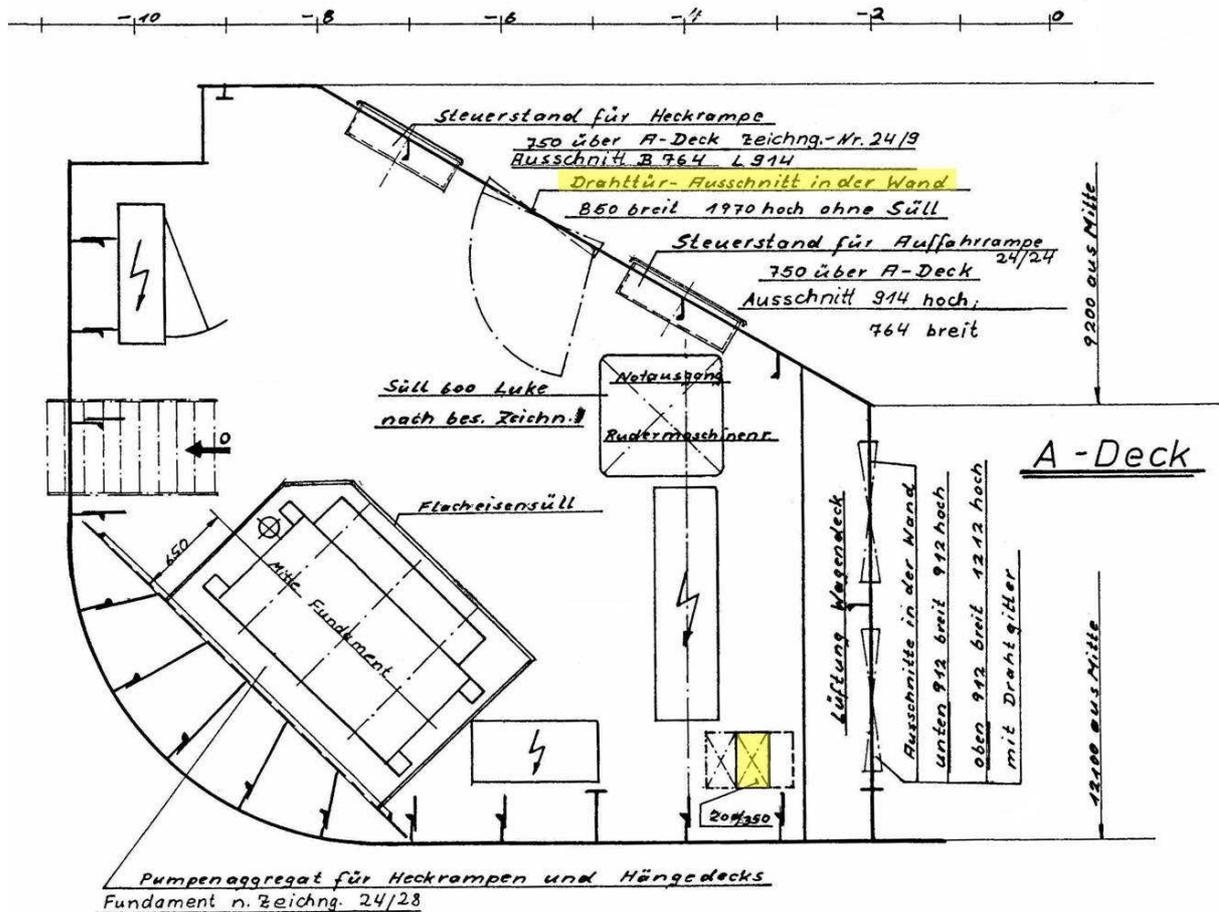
Aft Wing House on Main Car Deck level, starboard side, top view, Drawing S 590 – 24/2
